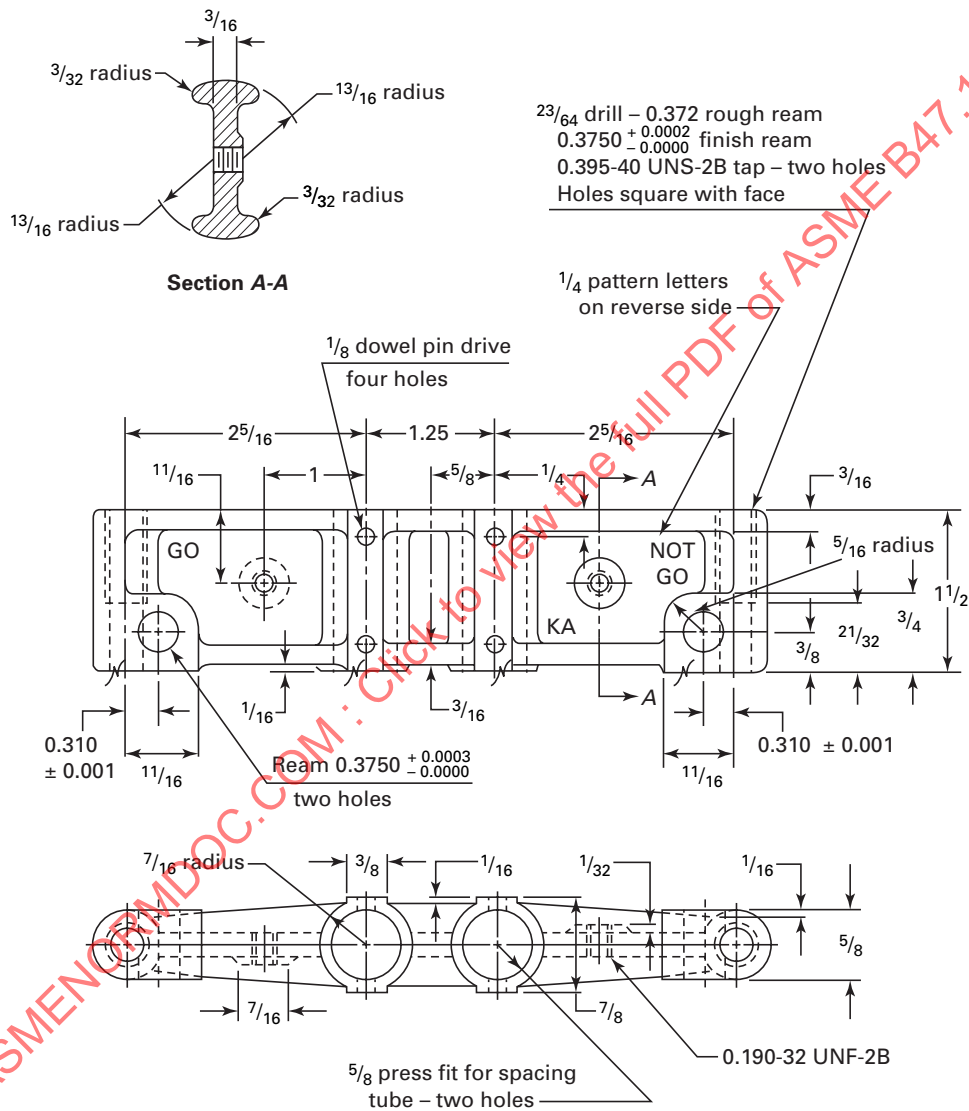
Adjustable Length Gage, Double Sided, Model KA, Details of Gage Heads
